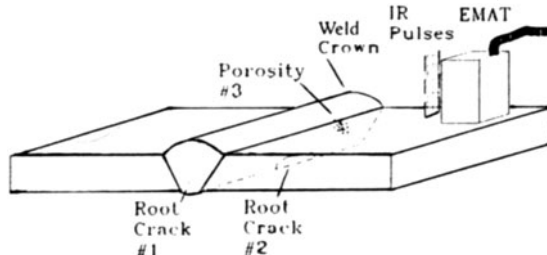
Weld inspection using the ten cavity pulsed laser/EMAT system.
